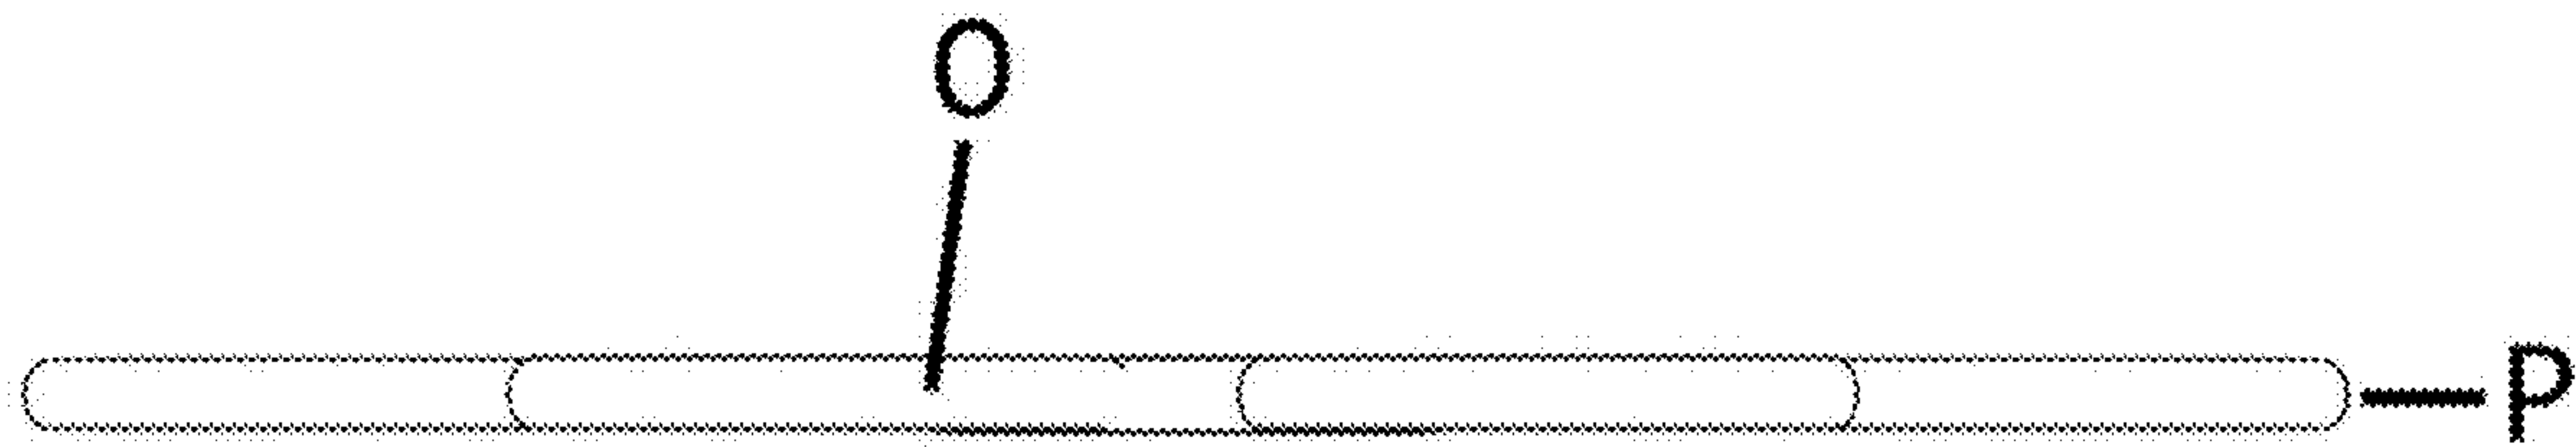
Edge view of Connecting Element to depict rounded edge of said element
